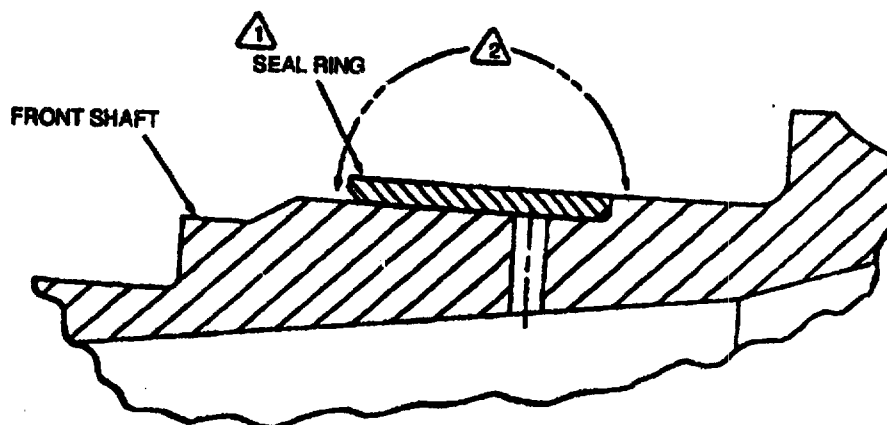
Rework of Compressor Rotor Front Shaft.
